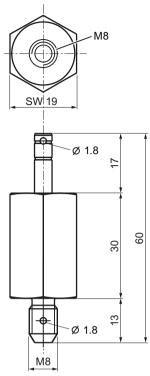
Dimension drawing of quick change holder 6GT2690-0AH00
